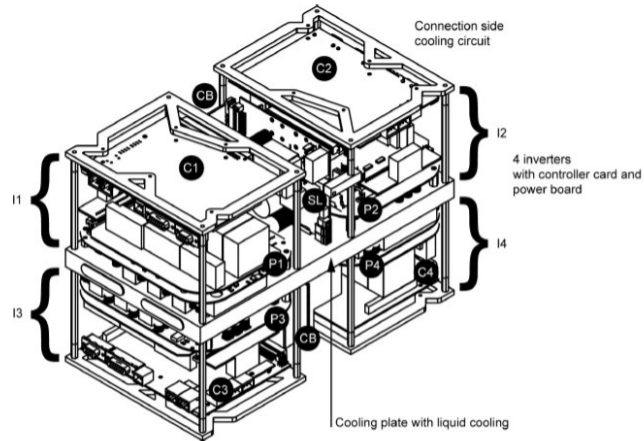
AMKASYN KW26-S5-FSE-4Q Initial inverter assembly view [2]
